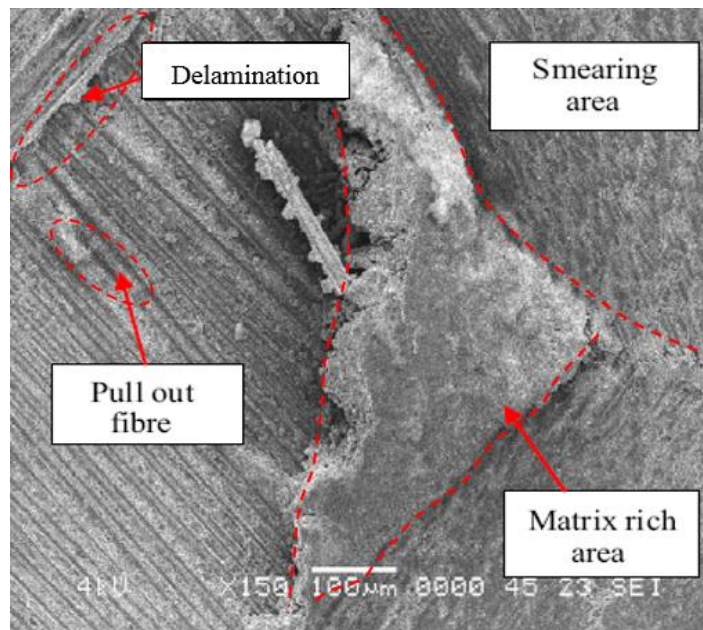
Defects on CFRP machined surface (Nor Khairusshima et al. 2013)
